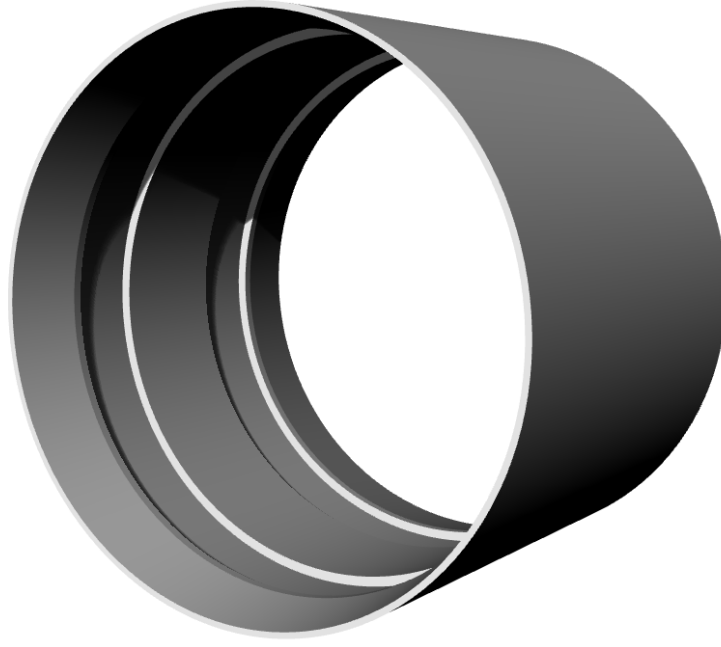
One embodiment of the surgical magnetic holding member.
